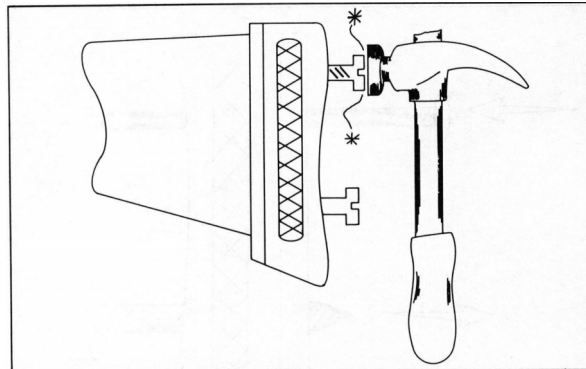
Making locating dimples to mark screw holes in wood.
